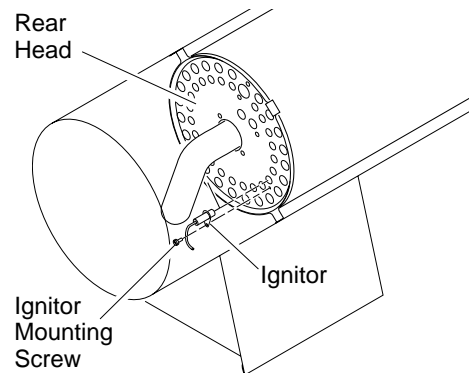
Removing Ignitor Mounting Screw and Ignitor
